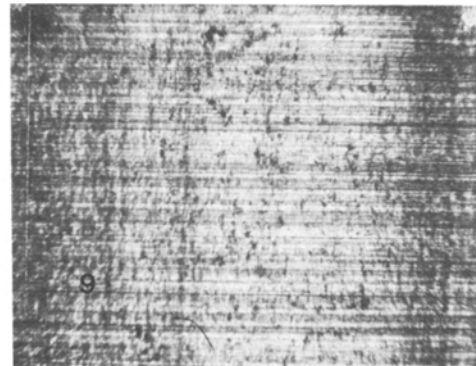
Optical micrograph of machined surface. Cutting speed 25 ft min<sup>-1</sup> (12.7 cm sec<sup>-1</sup>); wearland length 0.020 in. (0.051 cm.); rake angle 25°; dry cutting. × 25
